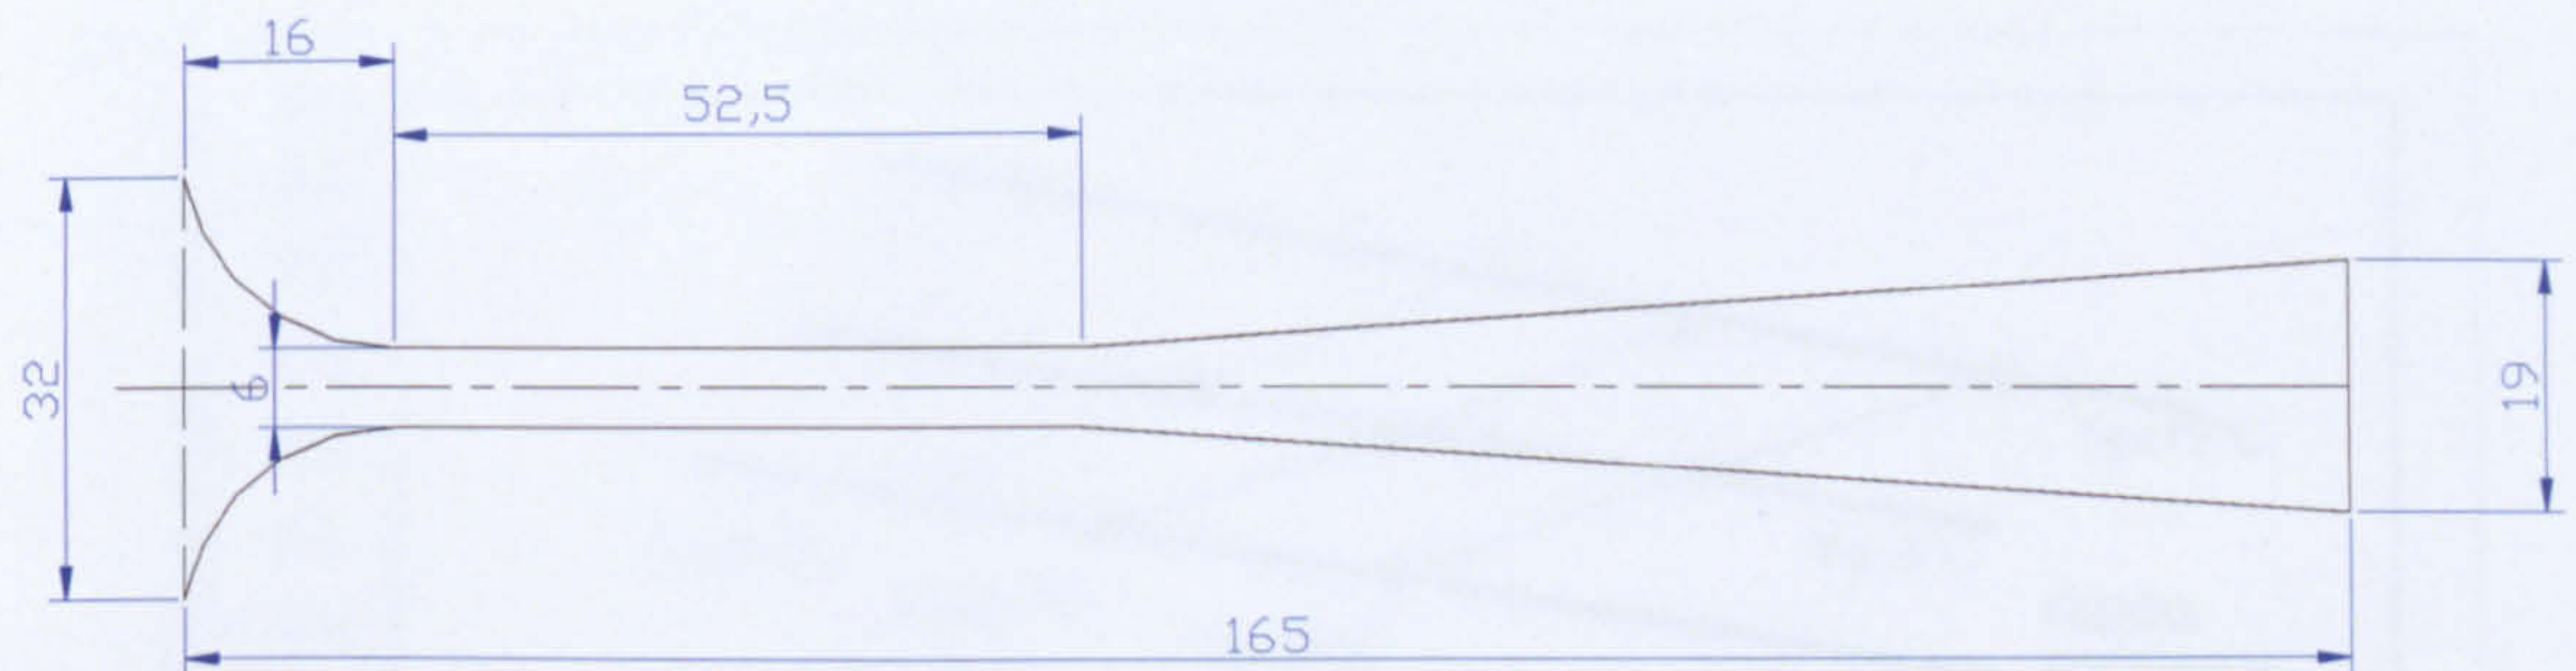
3 R236fa Conventional Diffuser dimensions (mm)
